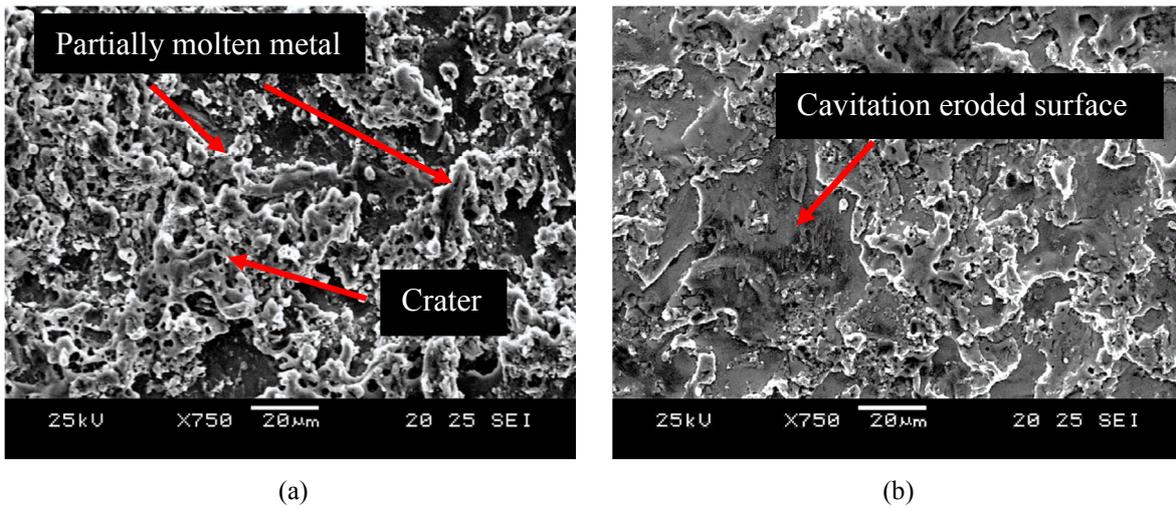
(a) EDM cut surface of SAE 304 stainless steel (b) surface after USM at P=200 kPa
